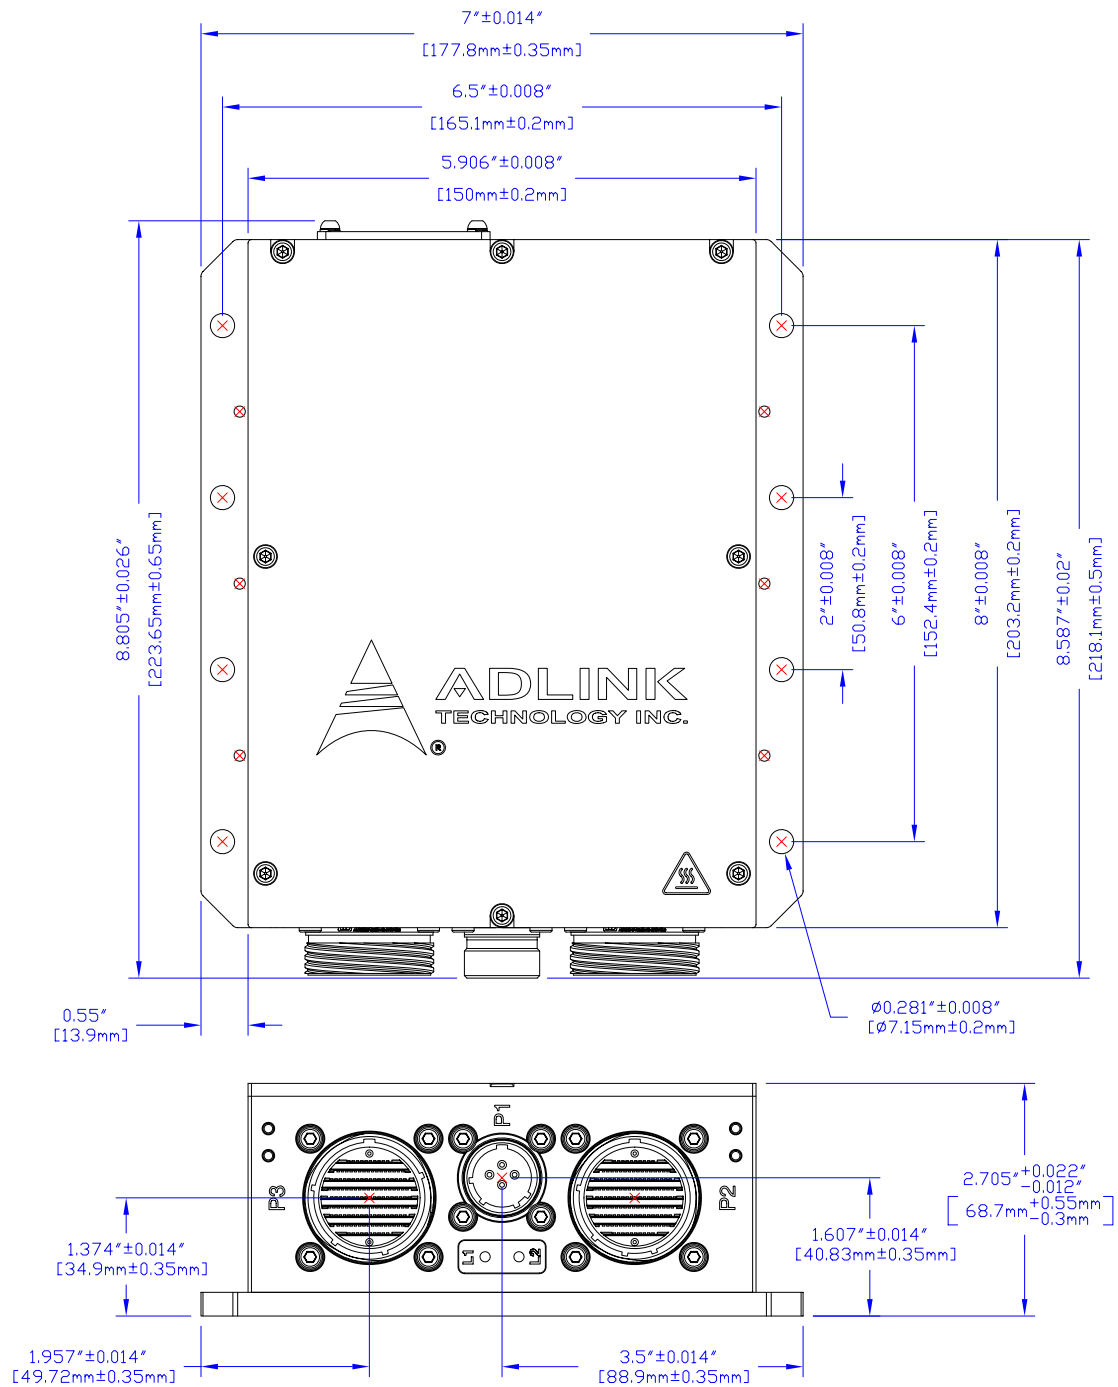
Top and Front Views of “HC” Enclosure with Mounting Dimensions
